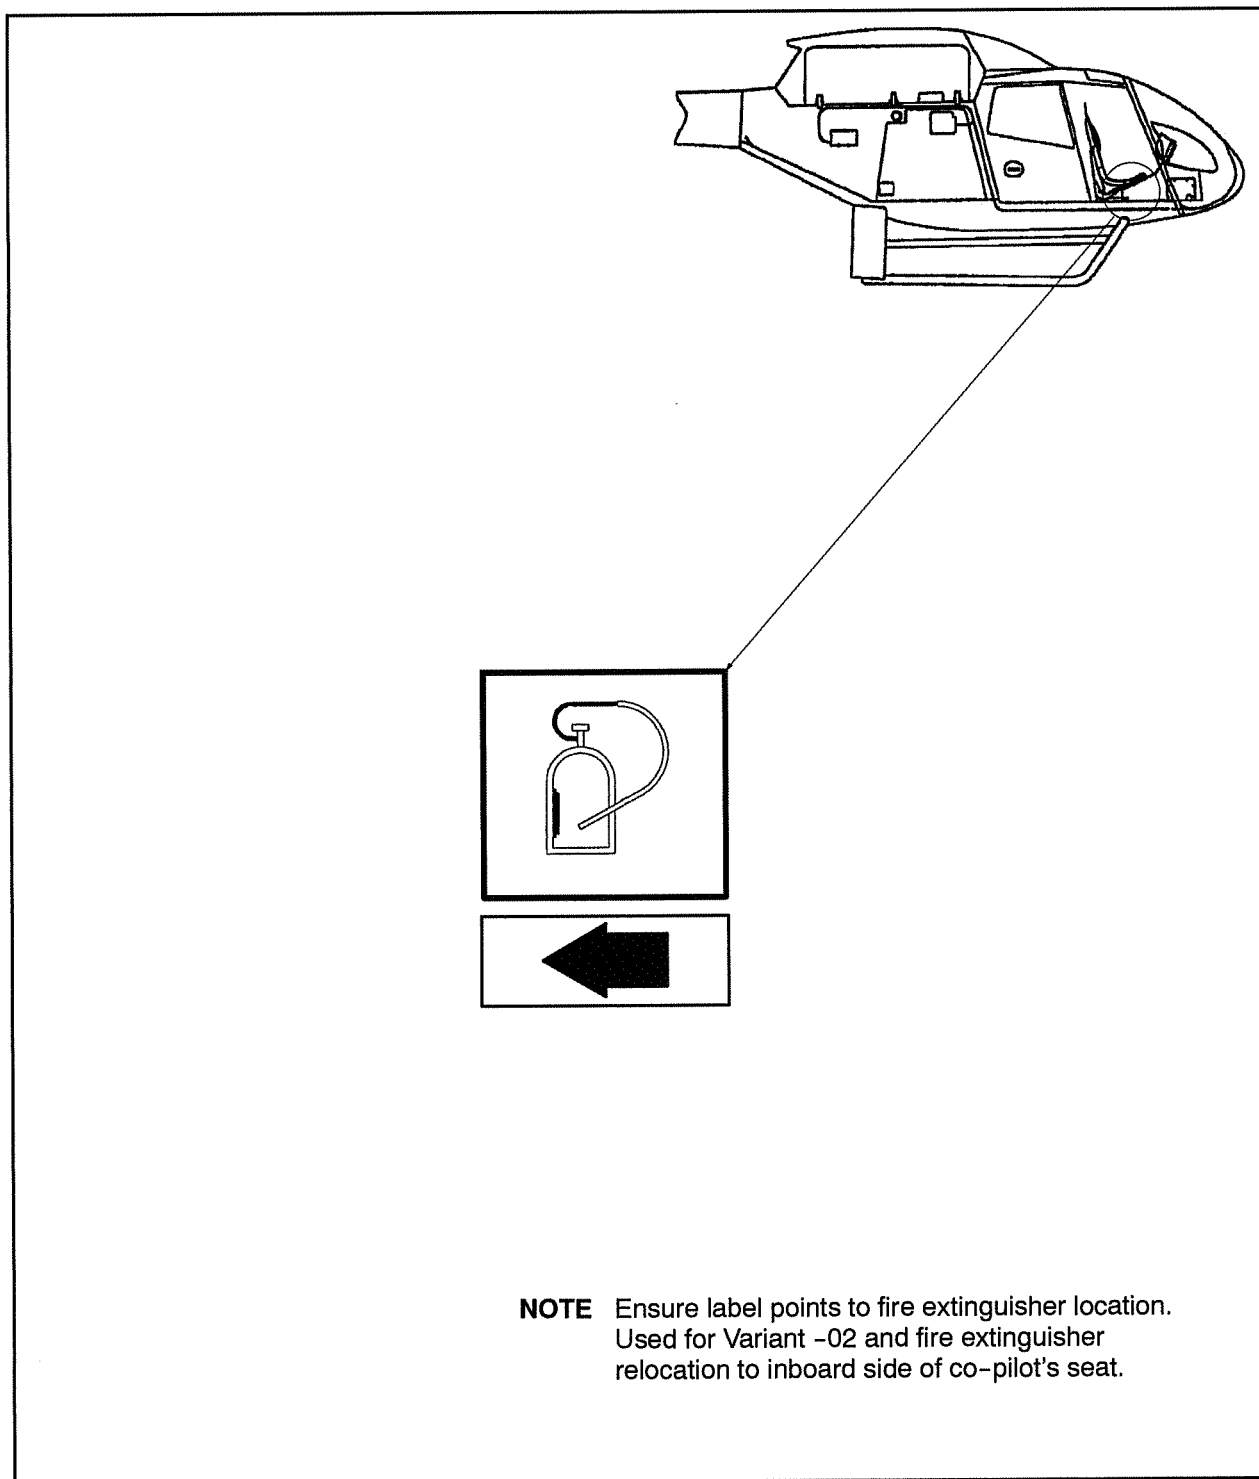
Placard location on back of fire extinguisher holder assembly (Original Version)
